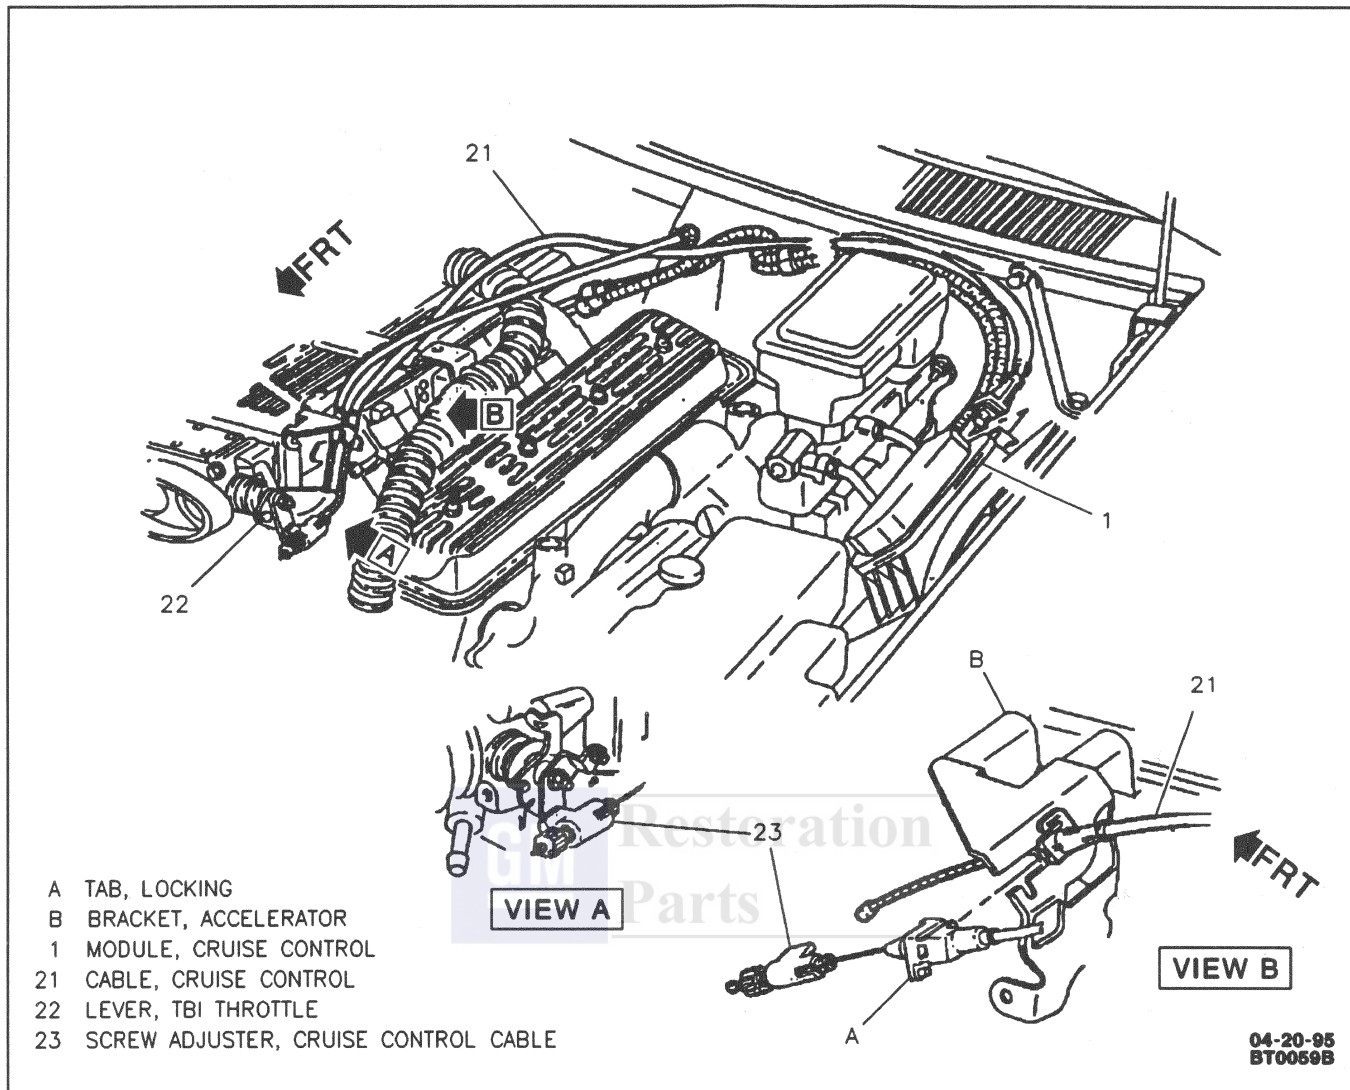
Cruise Control Cable-to-Throttle Body Injector
